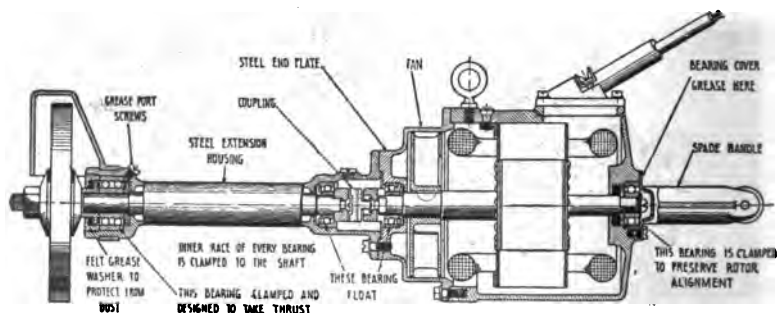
,943.—Van Dom direct drive electric grinder; sectional view showing construction.
